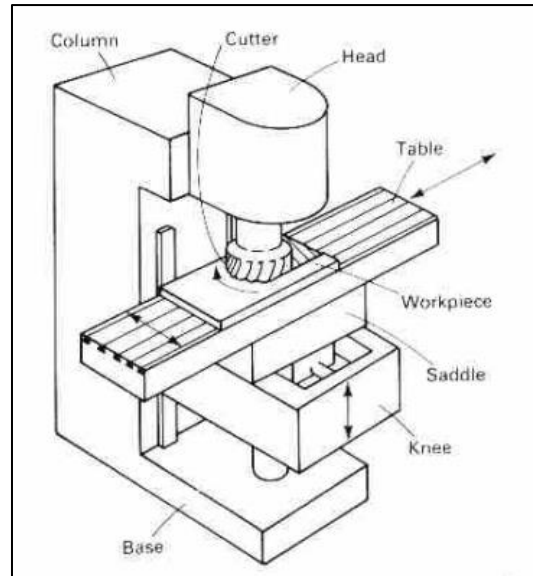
A typical machine setup for vertical milling used for horizontal machining [62].
